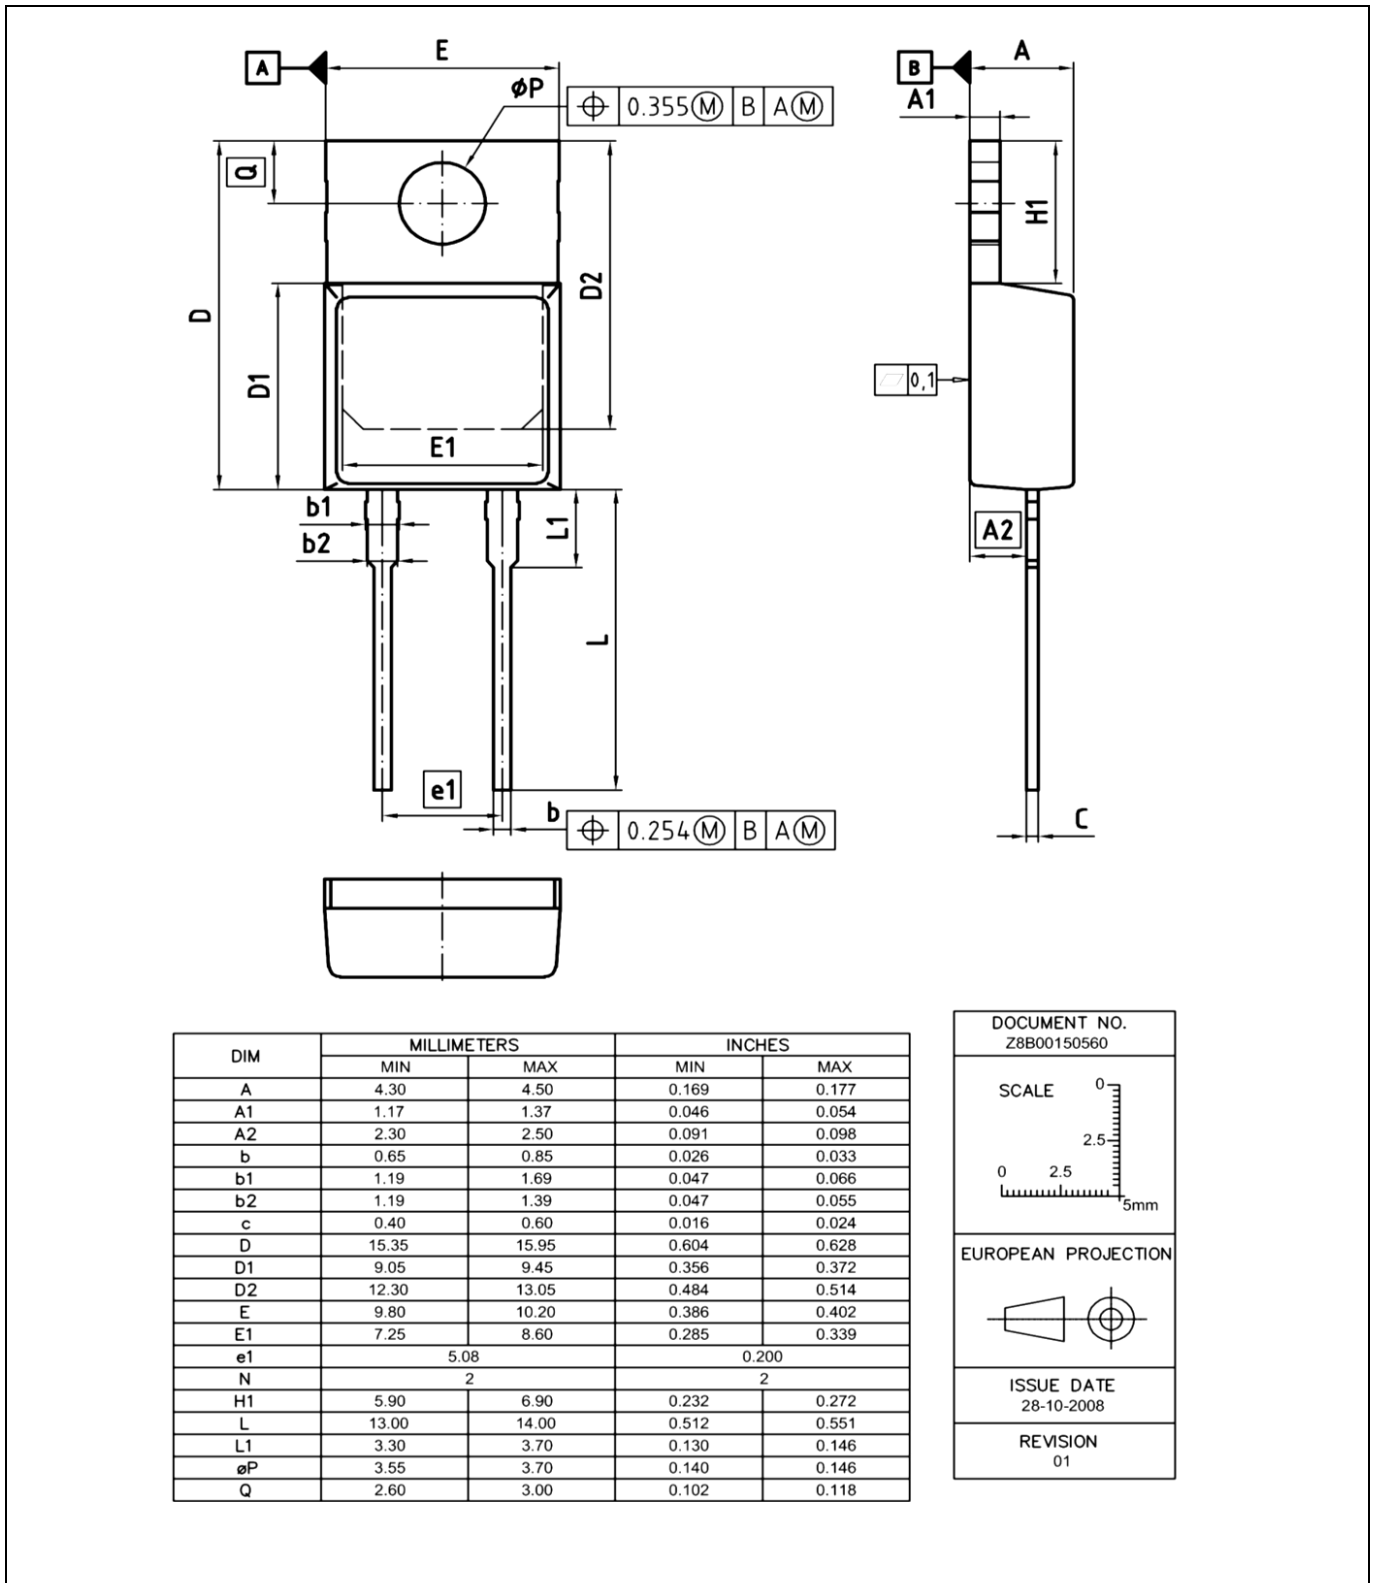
Outlines of the package PG-TO220-2, dimensions in mm/inches
